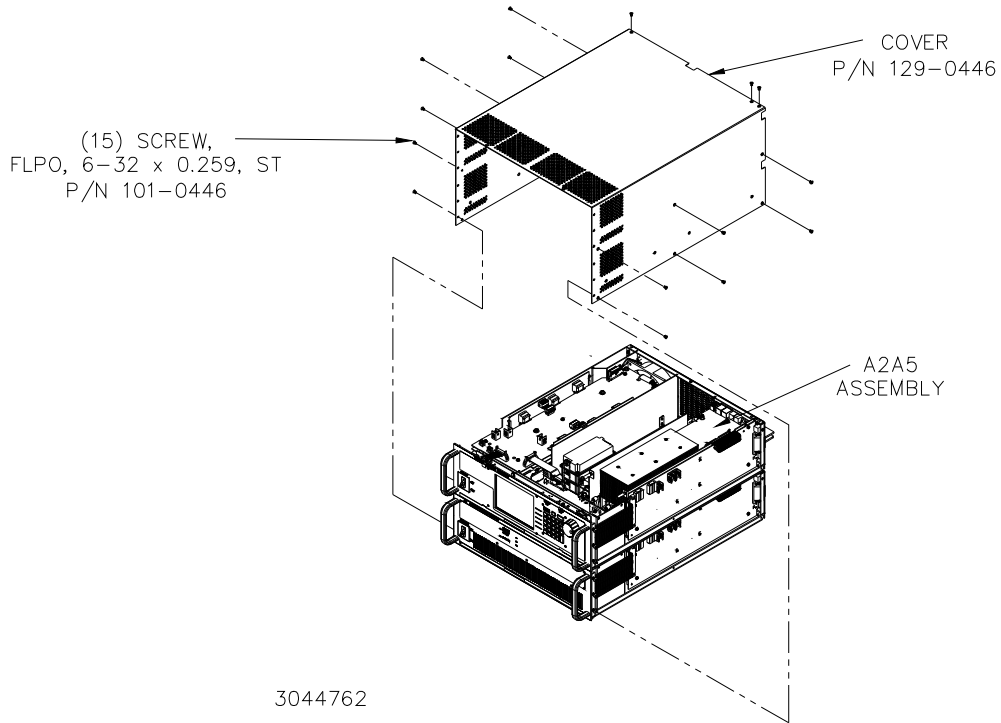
COVER REMOVAL AND A2A5 ASSEMBLY LOCATION
